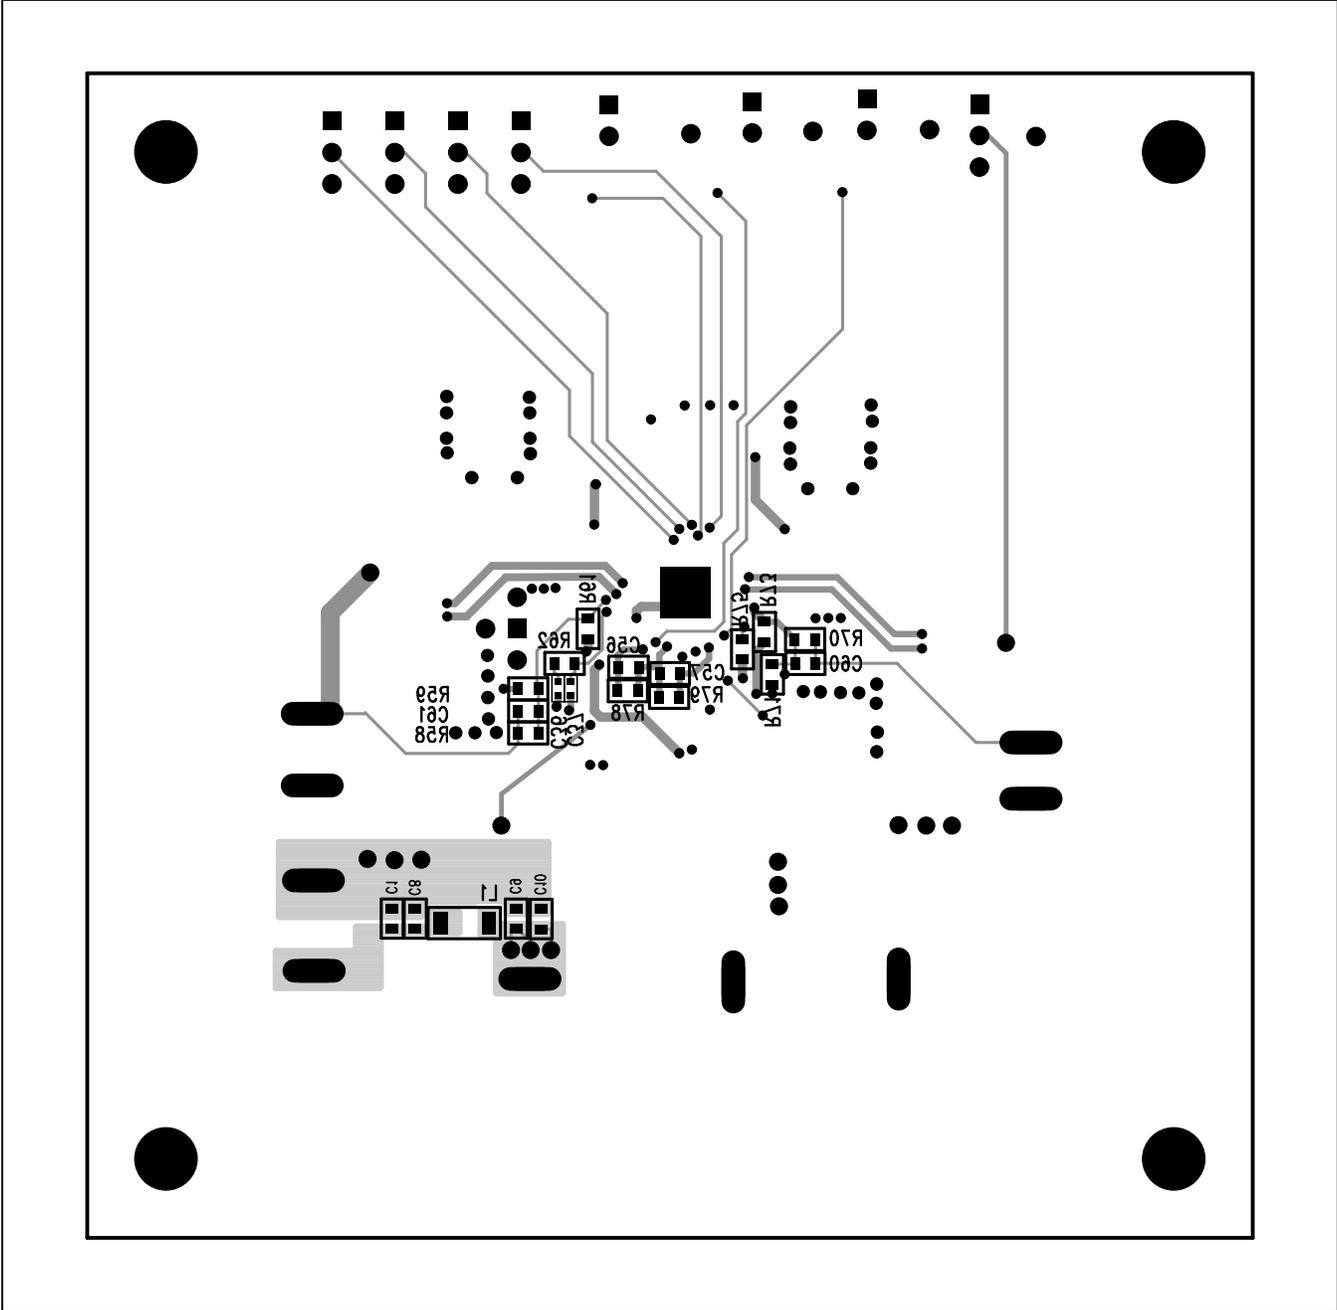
MAX16930 EV Kit PCB Layout—Solder Side
